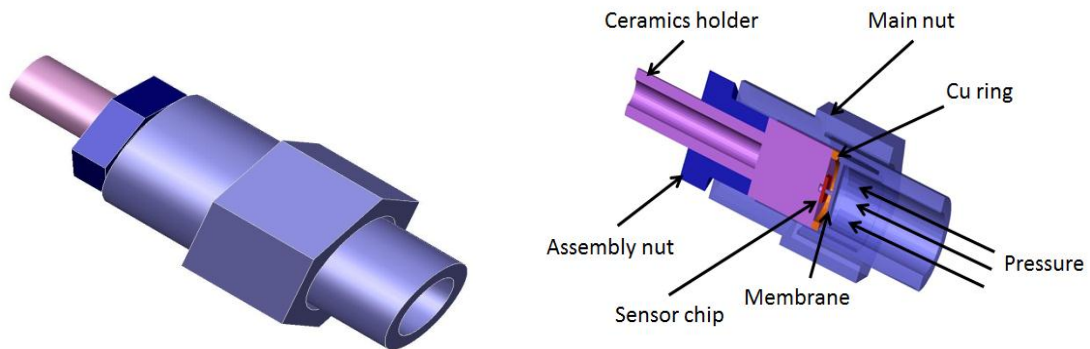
Packaging structure - 3D image of whole and cross-section isometric view
